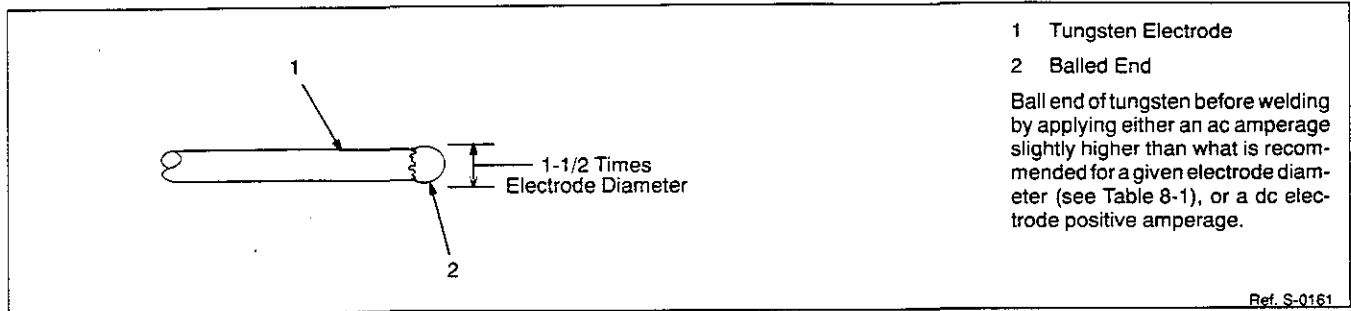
Preparing Tungsten For AC Or DC Electrode Positive (DCEP) Welding
